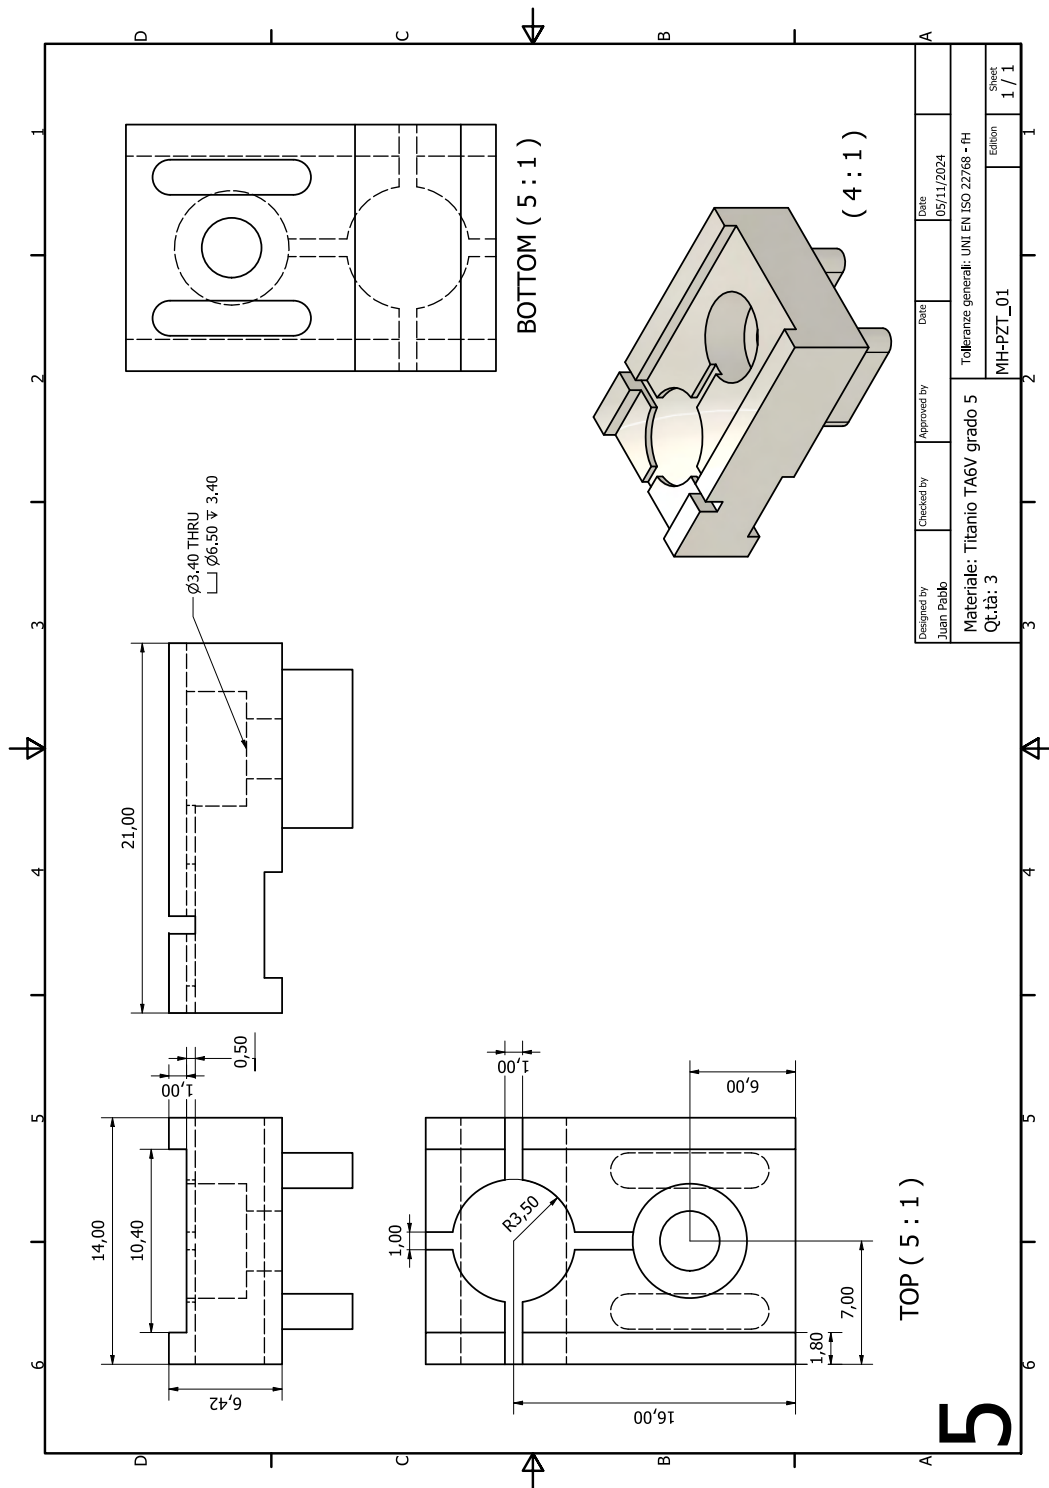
Technical drawing: bottom part of the composite mirror holder for the bow tie cavity.
